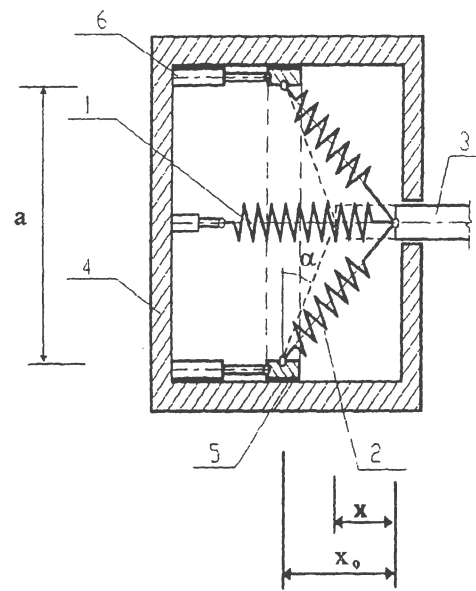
20 Variable stiffness coils spring assembly (Ribakov & Gluck, 1998)
